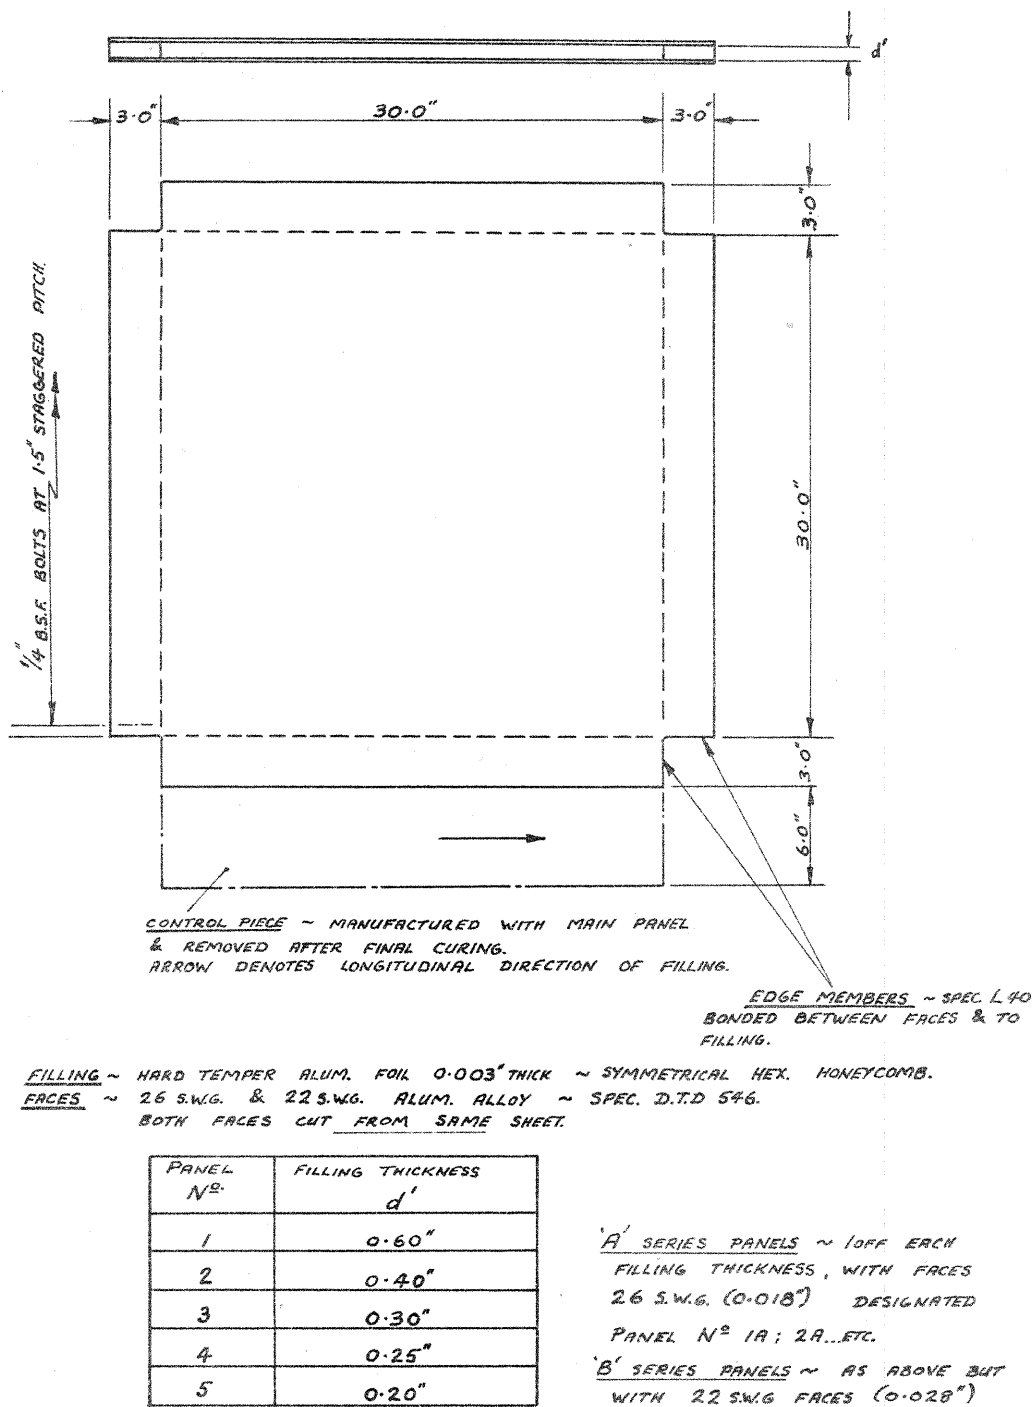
DETAILS OF PANEL SPECIMENS
